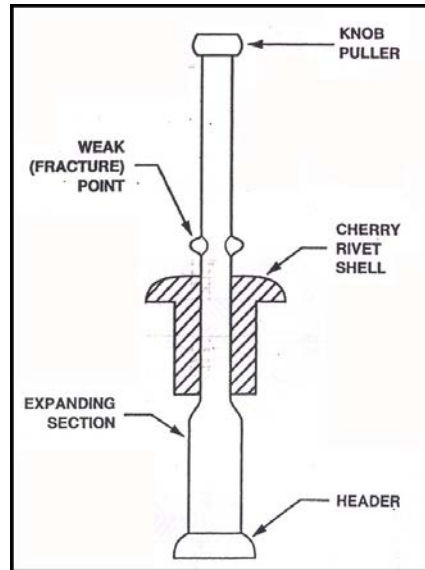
, The friction-lock rivet assembly consists of a shell and mandrel or pulling stem. The stem is pulled until the header forms a bucktail on the blind side of the shell.
